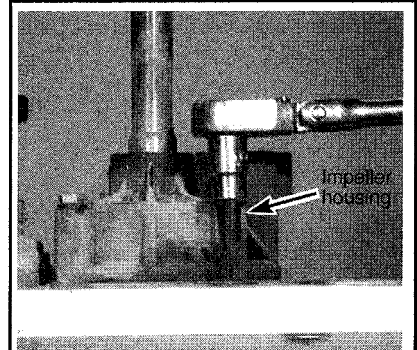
With all parts installed and the housing aligned, install and tighten the pump bolts
